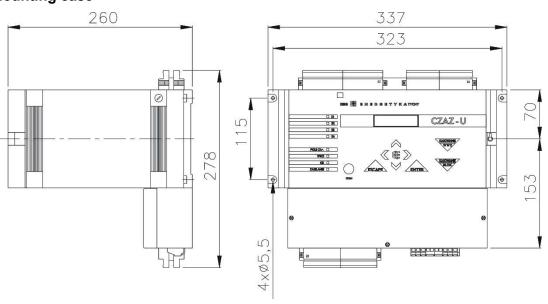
Rear and side view of the surface-mounting case - dimension drawing
